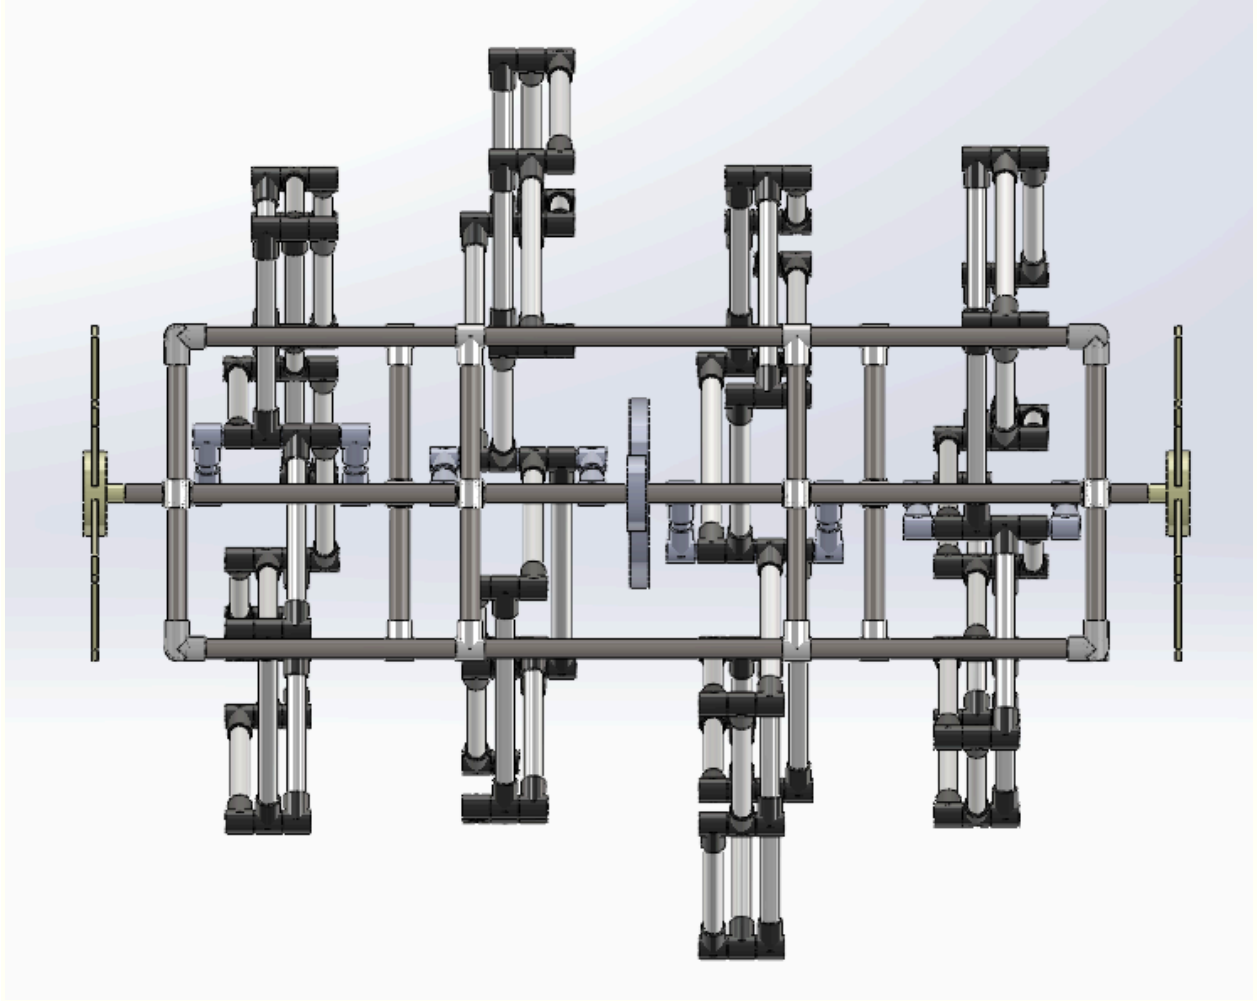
Solidworks Full Assembly Model (Top-Plane View)
